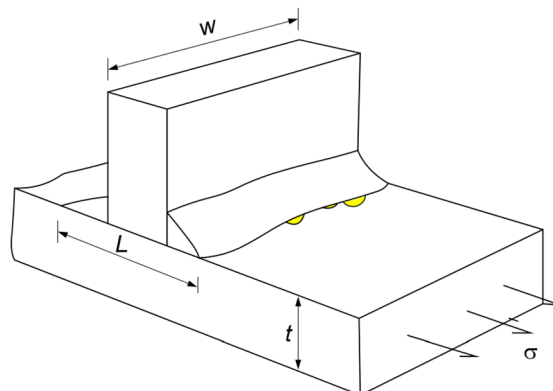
Typical configuration of test specimen with multiple cracks along the weld seam (T-joint specimen).
